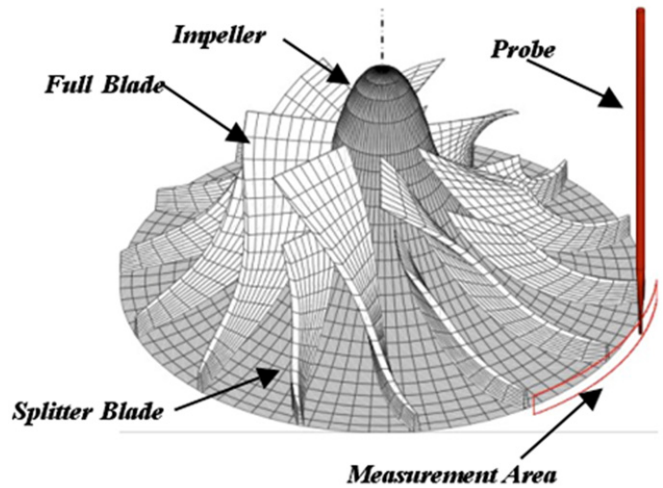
Impeller of the centrifugal compressor showing the probe location and measurement area.
